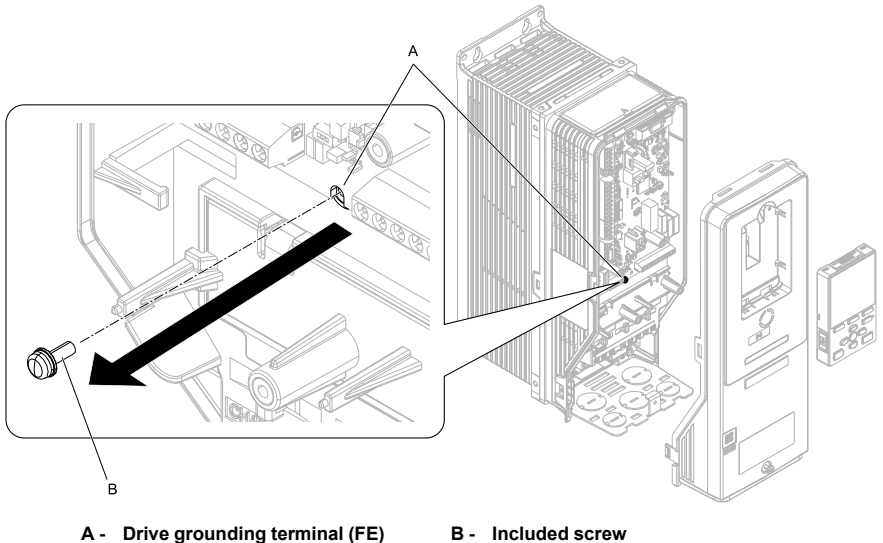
Remove the Screw from the Drive Grounding Terminal
